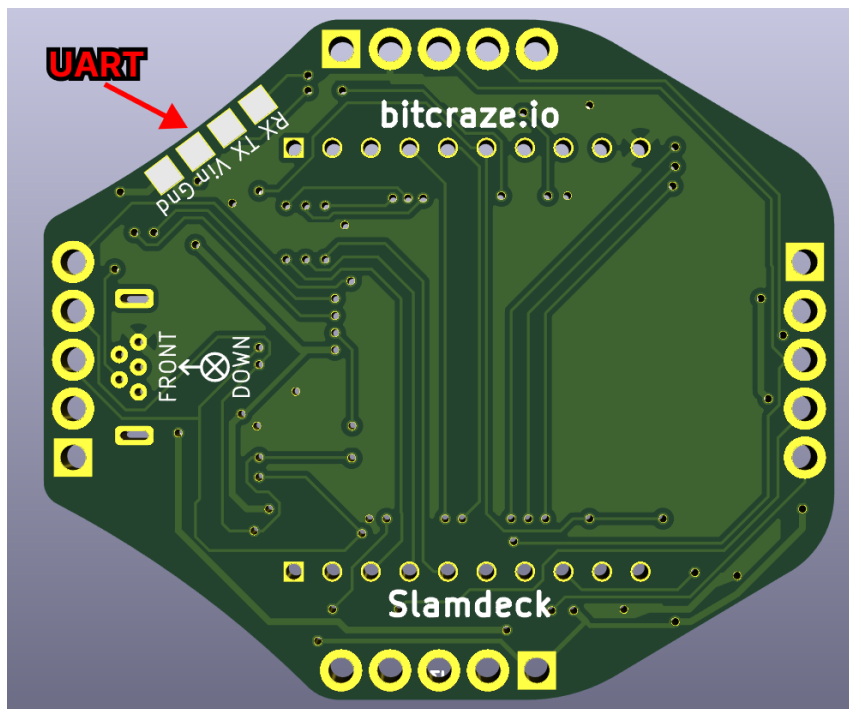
Main PCB board back view, in the 3D viewer of PcNew. Note the UART solder pads in the top left corner, which were placed there due to lack of space on the top side, while trying to make them easily accessible.
